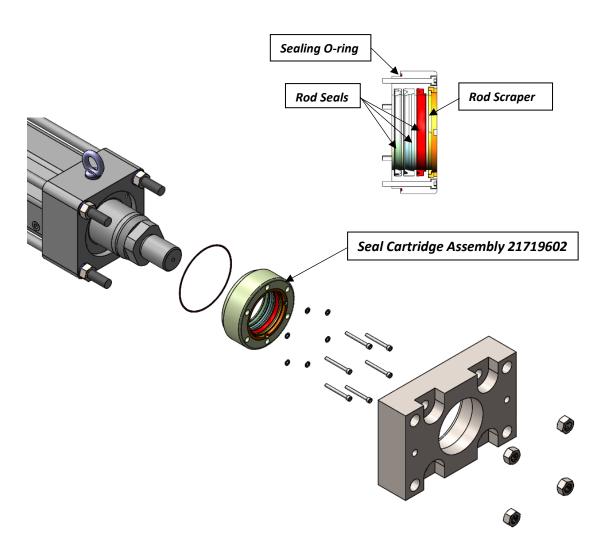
Exploded view of rod end of RSX actuator showing seal cartridge (with optional front flange mount)
